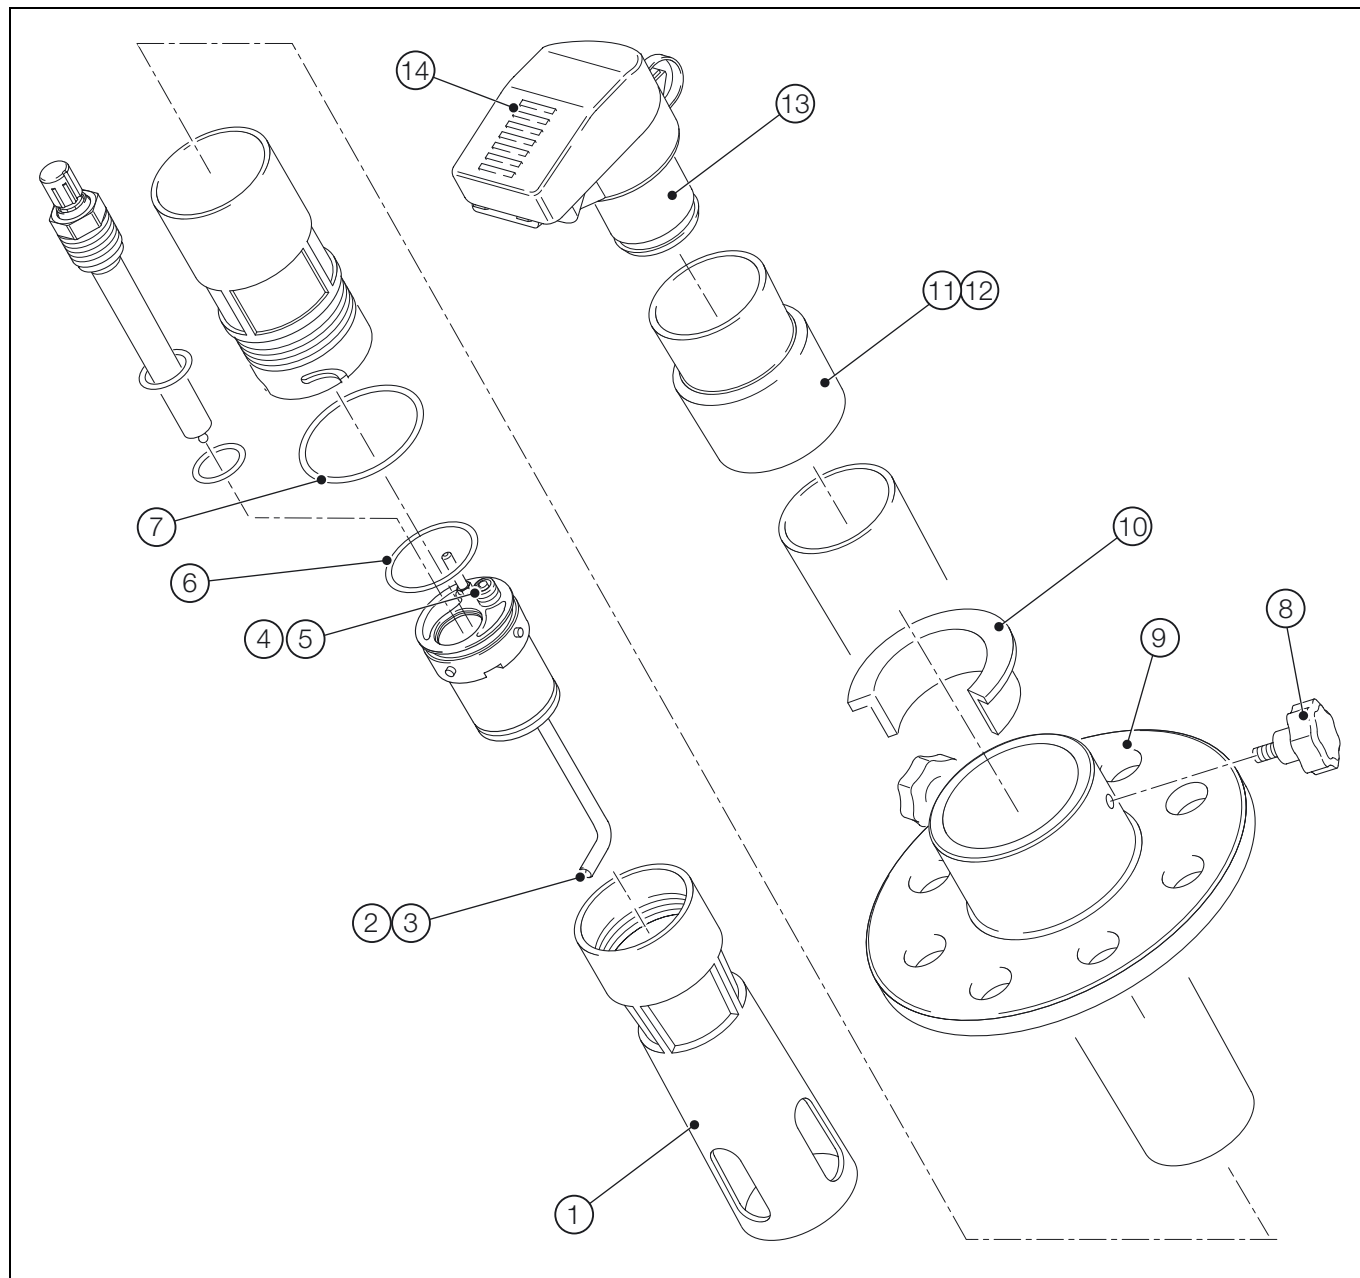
Model AP203 Flanged Immersion (Dip) System Spares
